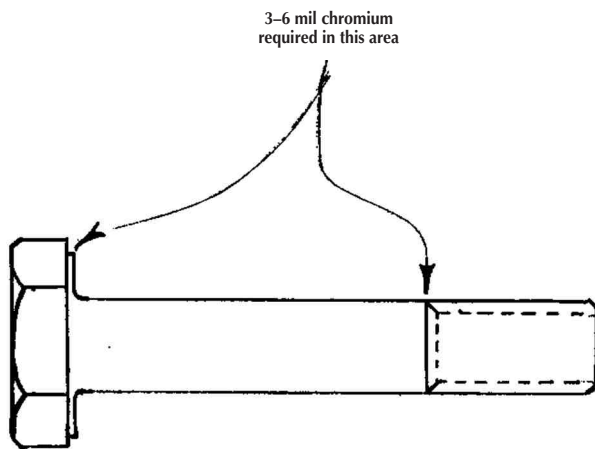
An additional 24 hours of plating deposited enough chromium in the fillet radius for grinding.
